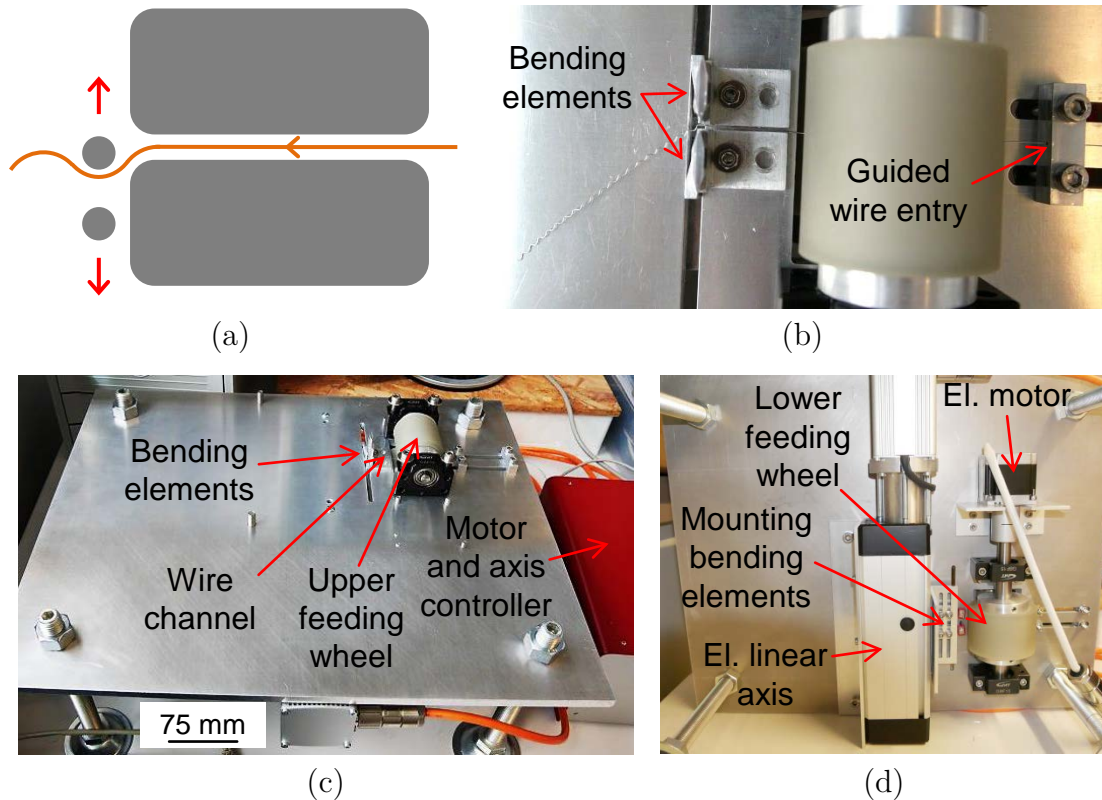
Wave-shaping with Machine 4 using Method 4 (bending elements + feeding wheels): (a) schematic drawing of the method (for schematic drawing of the single steps see Figure A.7 in the appendix), (b) detailed view on a wire interconnector in the wave-shaping process showing the upper feeding wheel, the wire channel and the bending elements, (c) top view on the test machine showing the upper feeding wheel, the motor and axis controller, the position of the wire inlet channel and the bending elements, as well as (d) bottom view of the wave-shaping machine showing the lower feeding wheel, the electrical axis and motor, and the mounting of the bending elements below the base plate.
